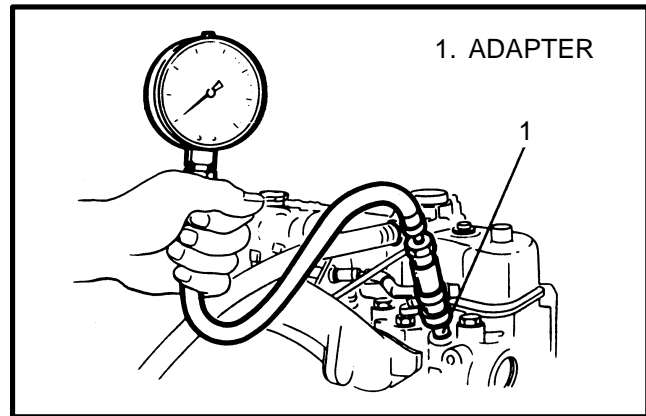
CHECK THE COMPRESSION PRESSURE
